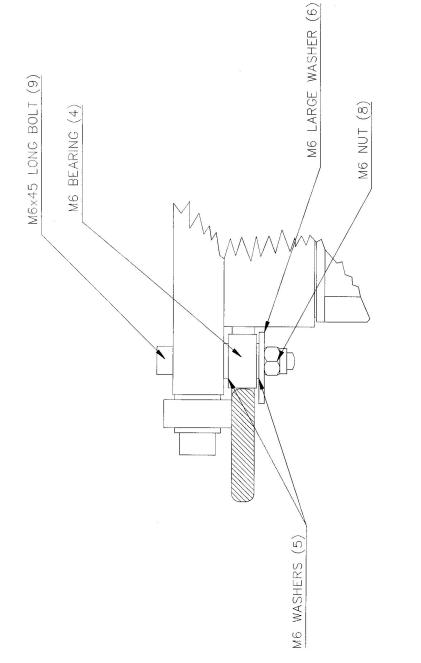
HORIZONTAL BEARING ASSEMBLY. NOTE THAT THE NUMBERS IN BRACKETS REFER TO THE ITEM NUMBERS IN THE CONTENTS LIST.
